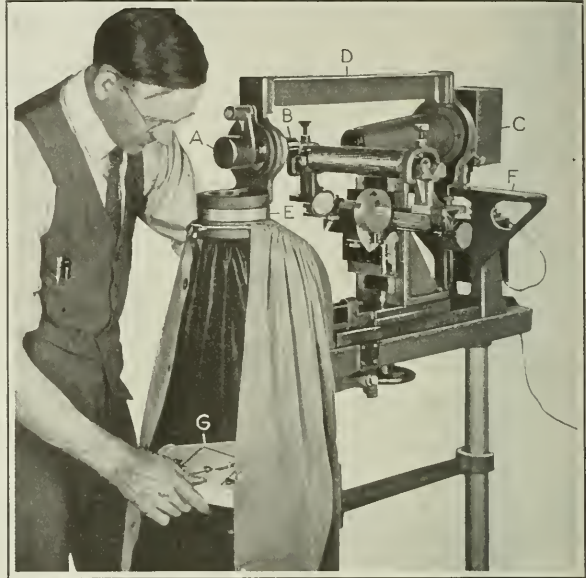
Adjusting the Optical Instrument for inspecting a Large Screw Thread
